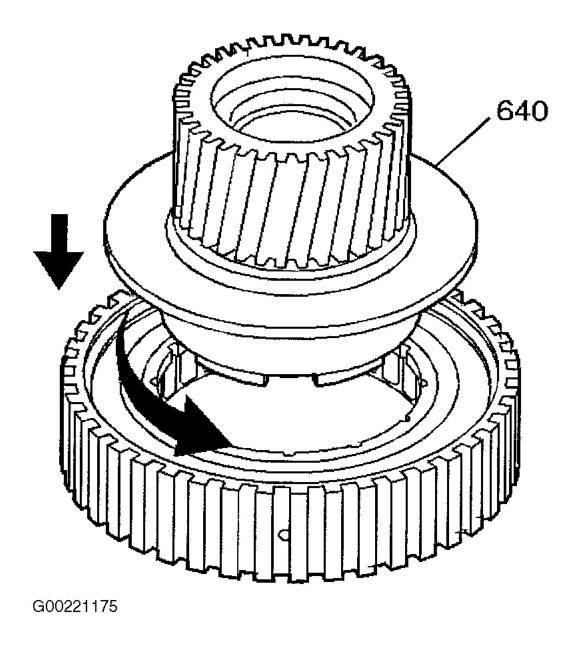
Installing Inner Race & Input Sun Gear Assembly Courtesy of GENERAL MOTORS CORP.
